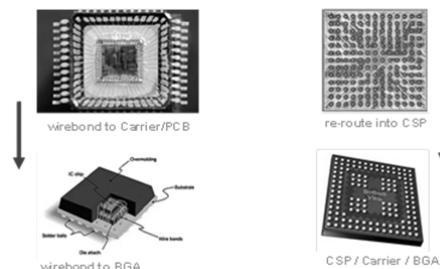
Stepping forward to subsequent soldering onto Printed Circuits
